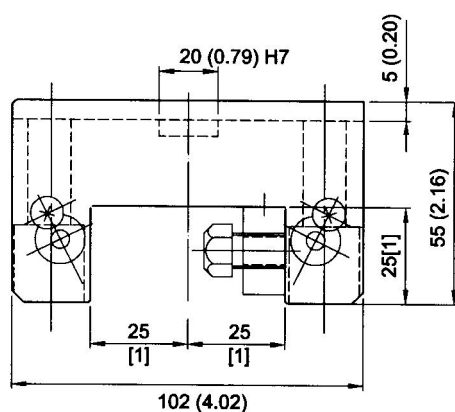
Toolholder Dimensions (OD Type II Toolholder)
